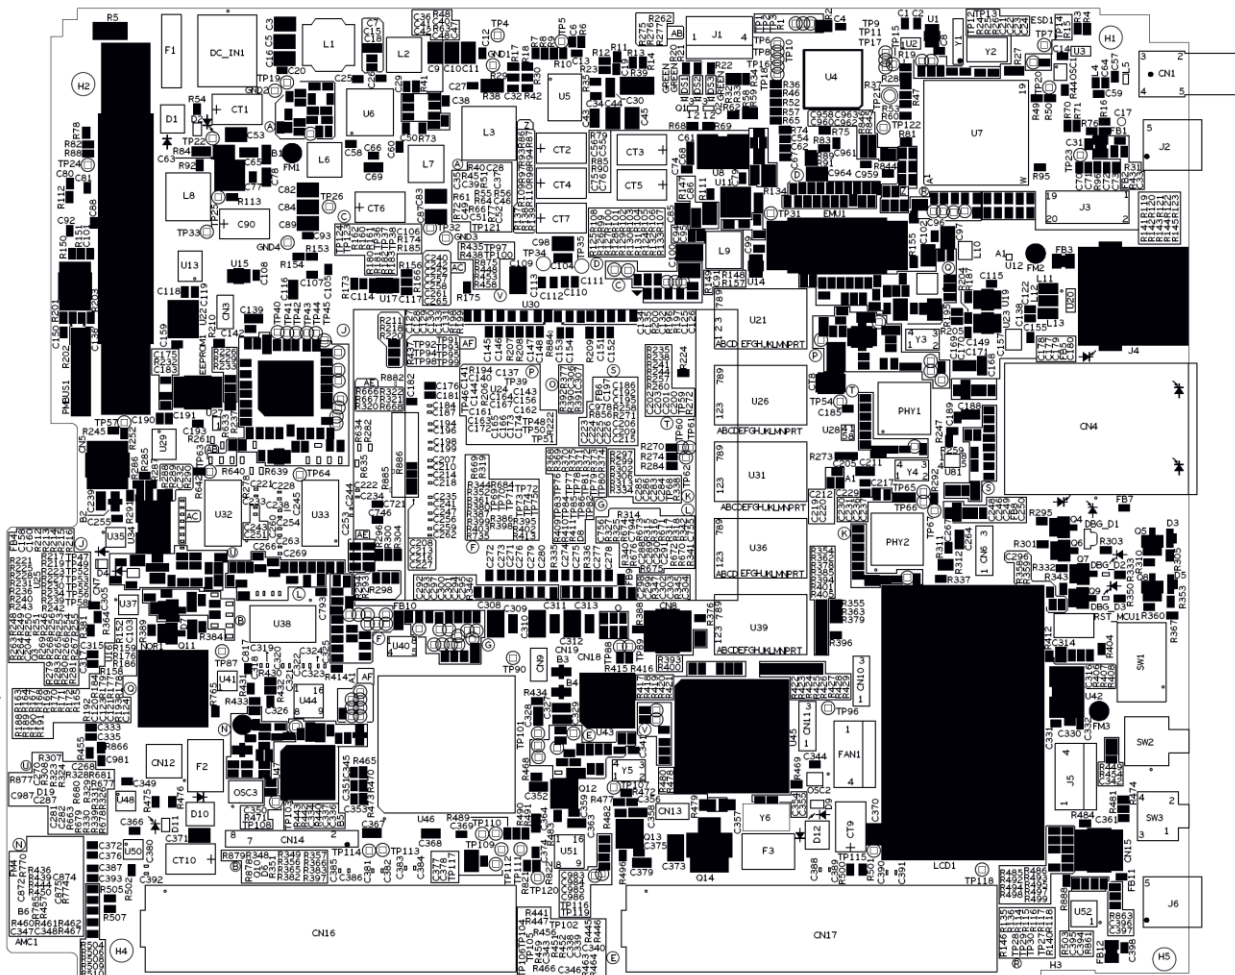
TCIEVMK2LX EVM Board Assembly Layout – TOP view
